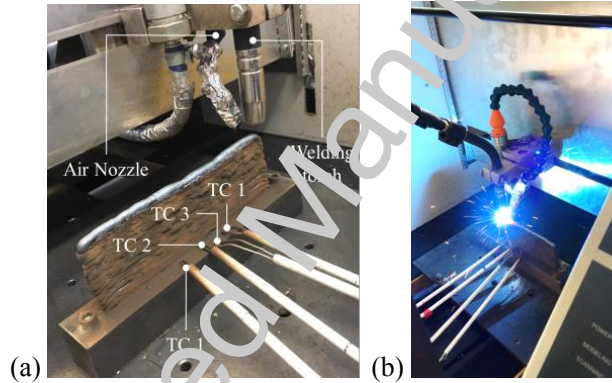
(a) Proposed cooling system, thermocouples arrangement and deposited test case. (b) Test case deposition using air jet cooling.
